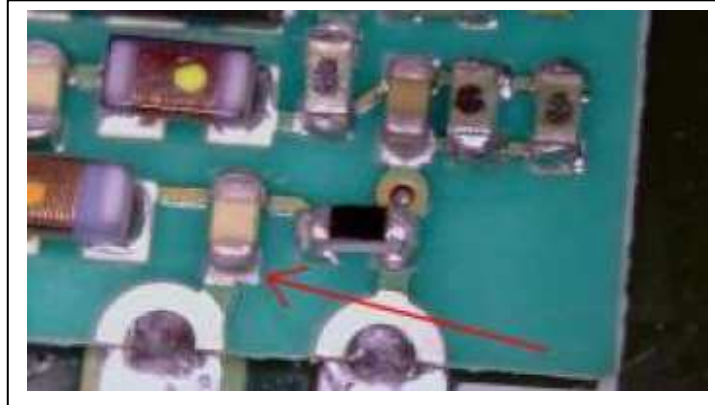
MRI PCB soldered with lead-free solder. Note poor wetting to arrowed chip capacitor and to several other components.
